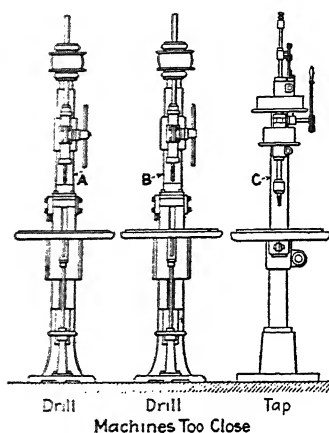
Example Showing Drilling Machines Set Too Close Together
